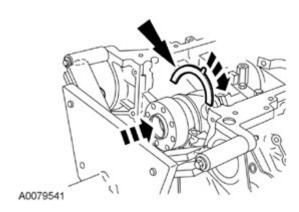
Installing Rear Crankshaft Upper Thrust Washer Courtesy of FORD MOTOR CO.
